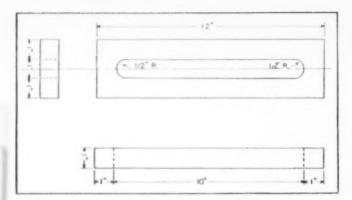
Drawing of Test Piece Developed by A. W. Barndt of Heintz Mfg. Company
